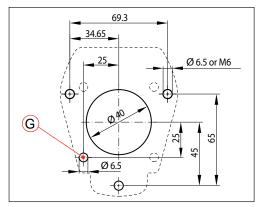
3-hole mounting, G = hole for M6 earthing bolt M6 (only for receptacle with special design F4)
